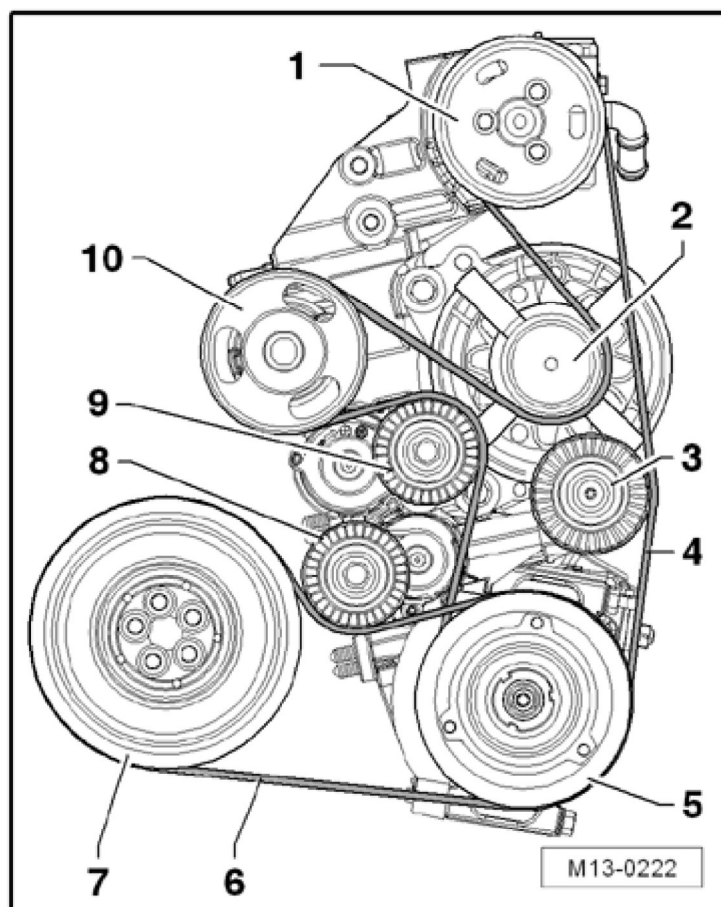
Placing Ribbed Belt For Generator, Vane Pump And Coolant Pump On To Belt Pulleys & On To Idler Pulley
